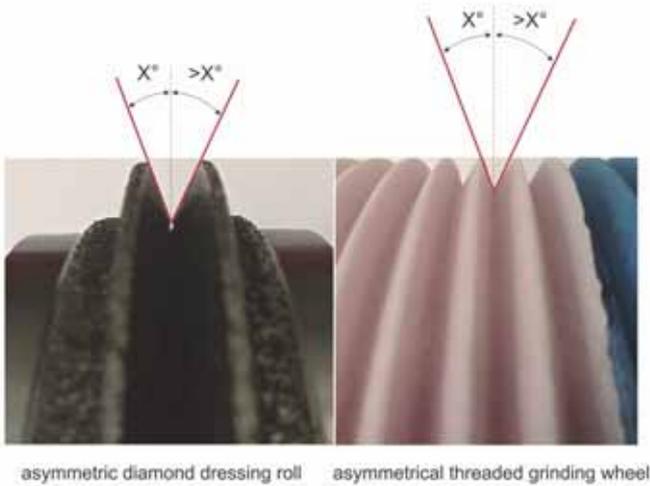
Diamond dressing roll and threaded grinding and polishing wheel
